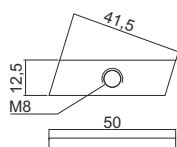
Shows the bracket UB1MC connecting the glass panel (PAL40H40...) to the post (NOWPAL40x40SR).
